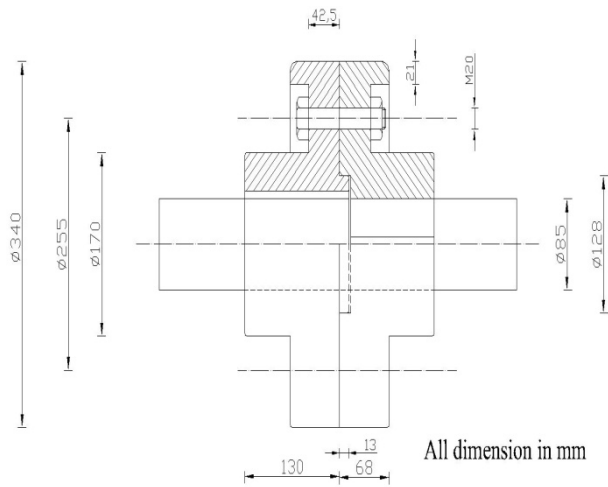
Auto CAD sketch of coupling with calculated dimensions
